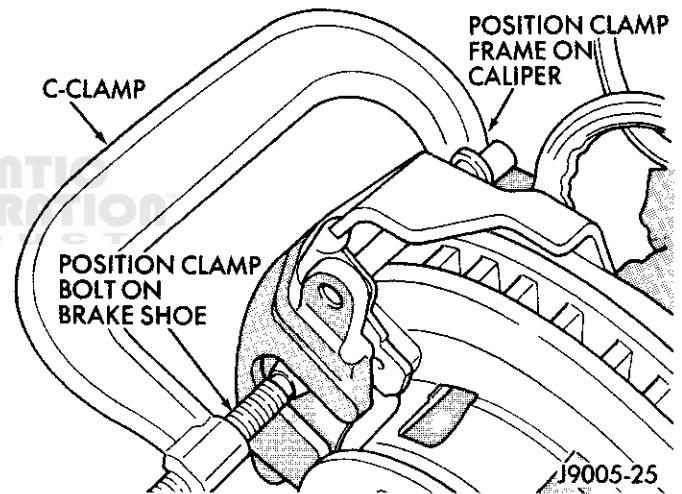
Bottoming Caliper Piston With C-Clamp—Typical
